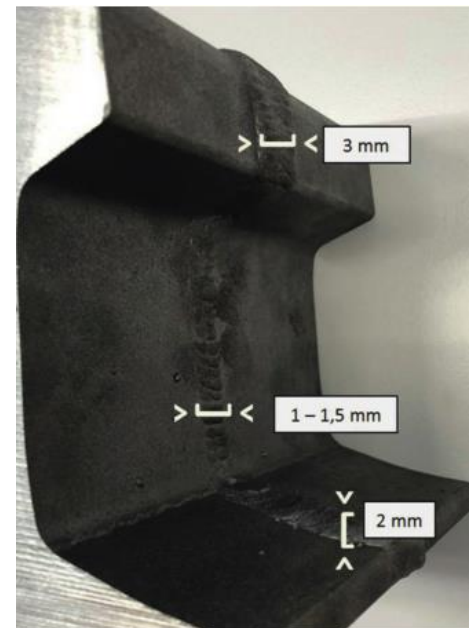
The projecting weld bead of an automated joint welding at the current state of development: Sufficient material for finish grinding is available at the railhead; no further work is required at the rest of the rail.
